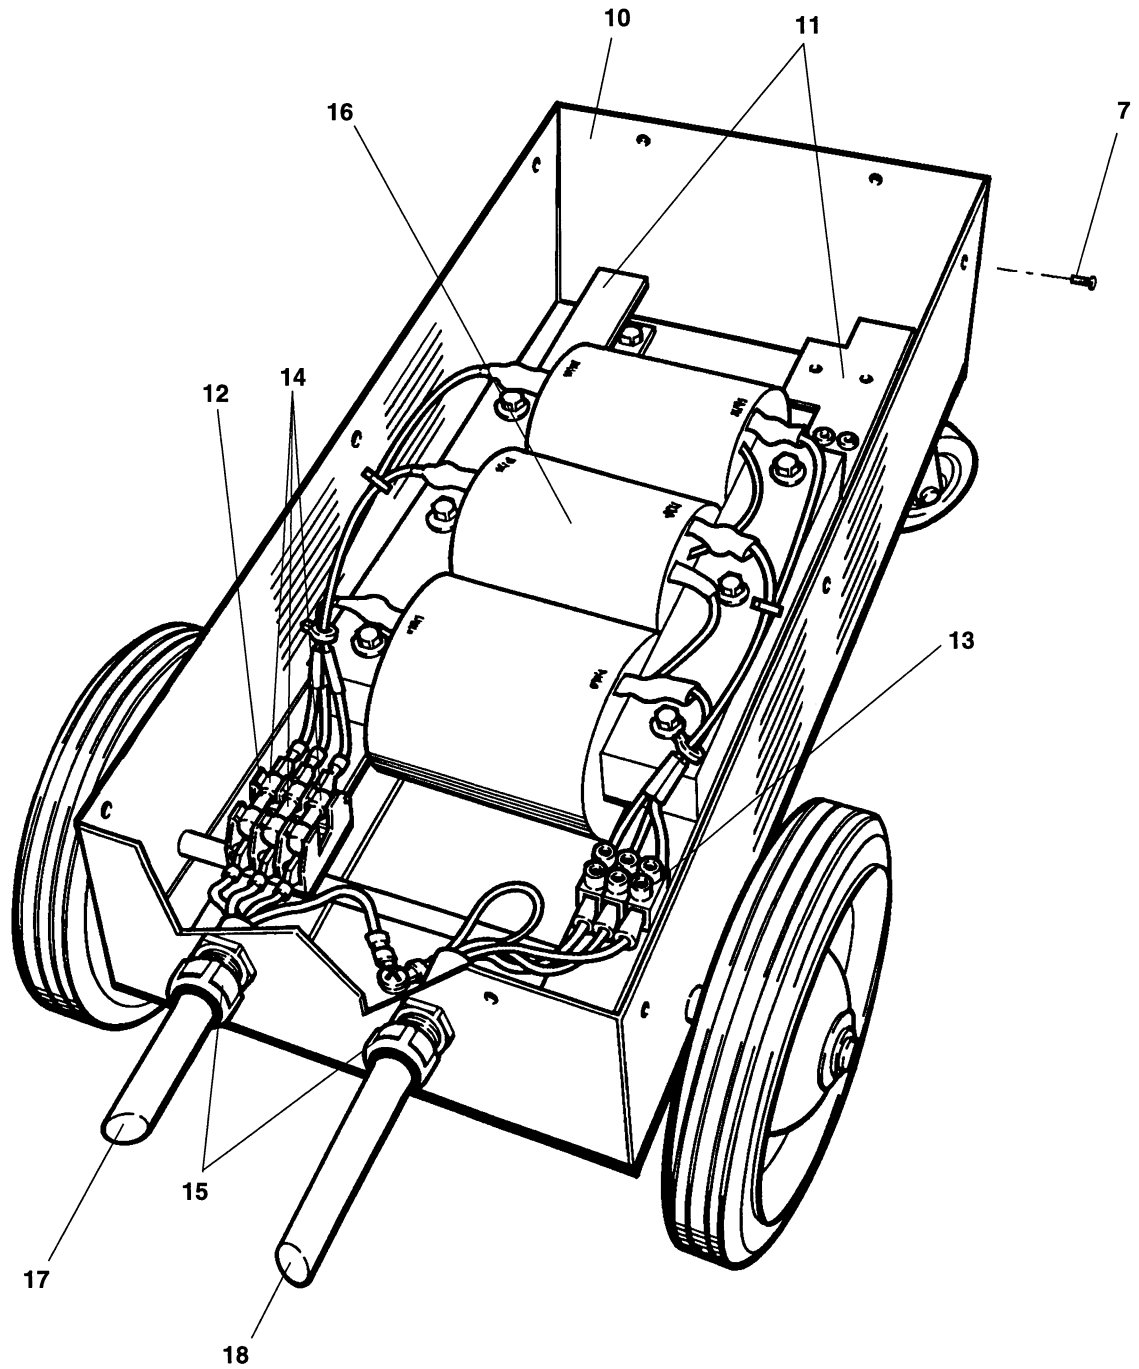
Powermax1100 600V Conversion Subassembly - 129223
